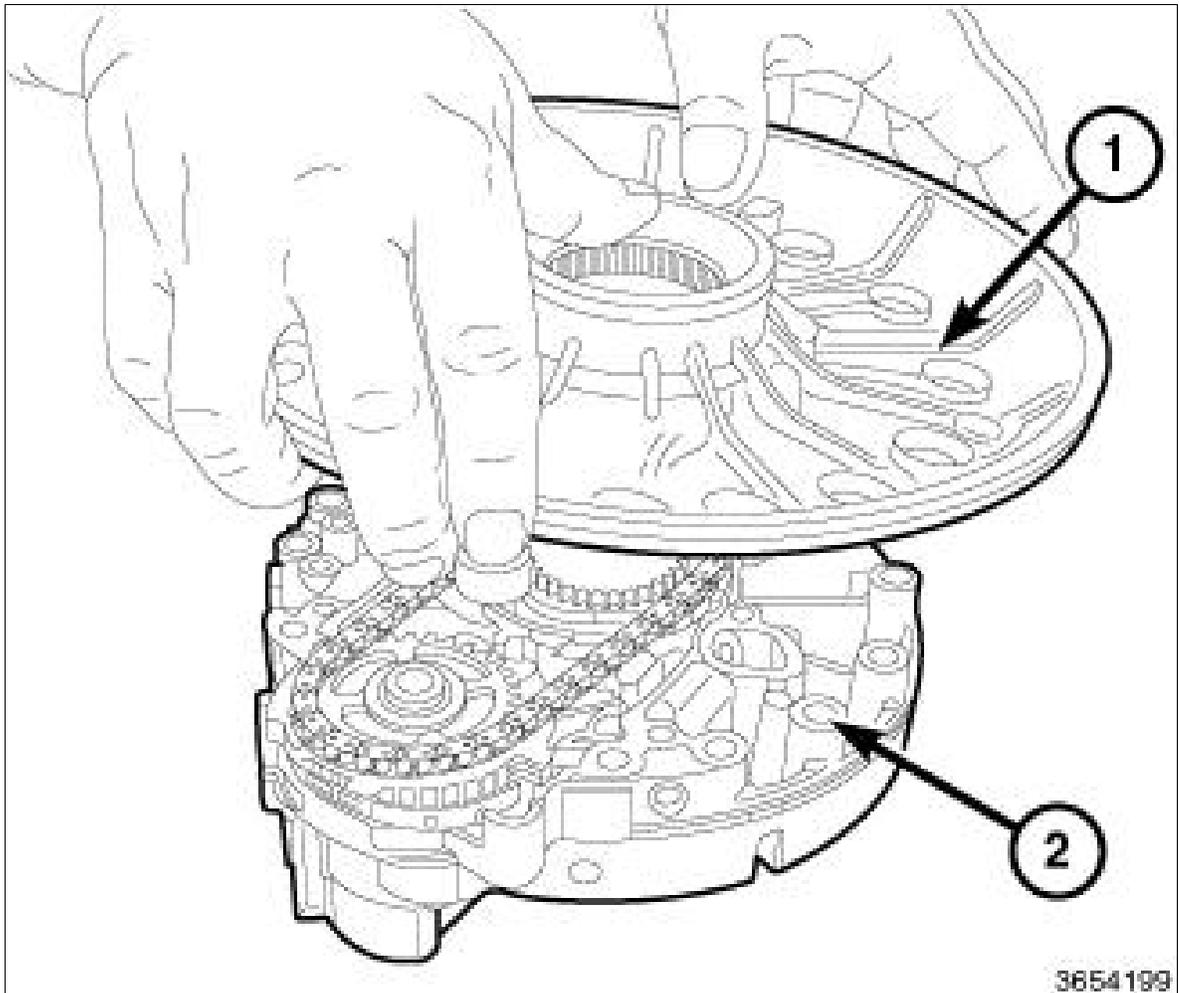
Six Bolts, Oil Pump Housing & Oil Pump Cover
